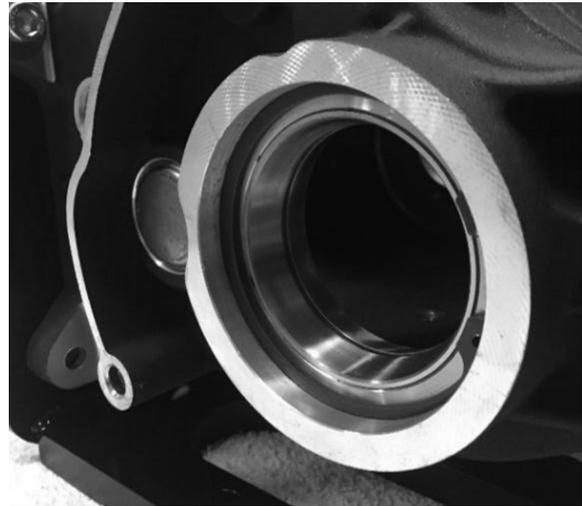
| LIGHTLY OIL BEARING RACES AFTER INSTALLING THE TAPERED BEARING ADAPTER
